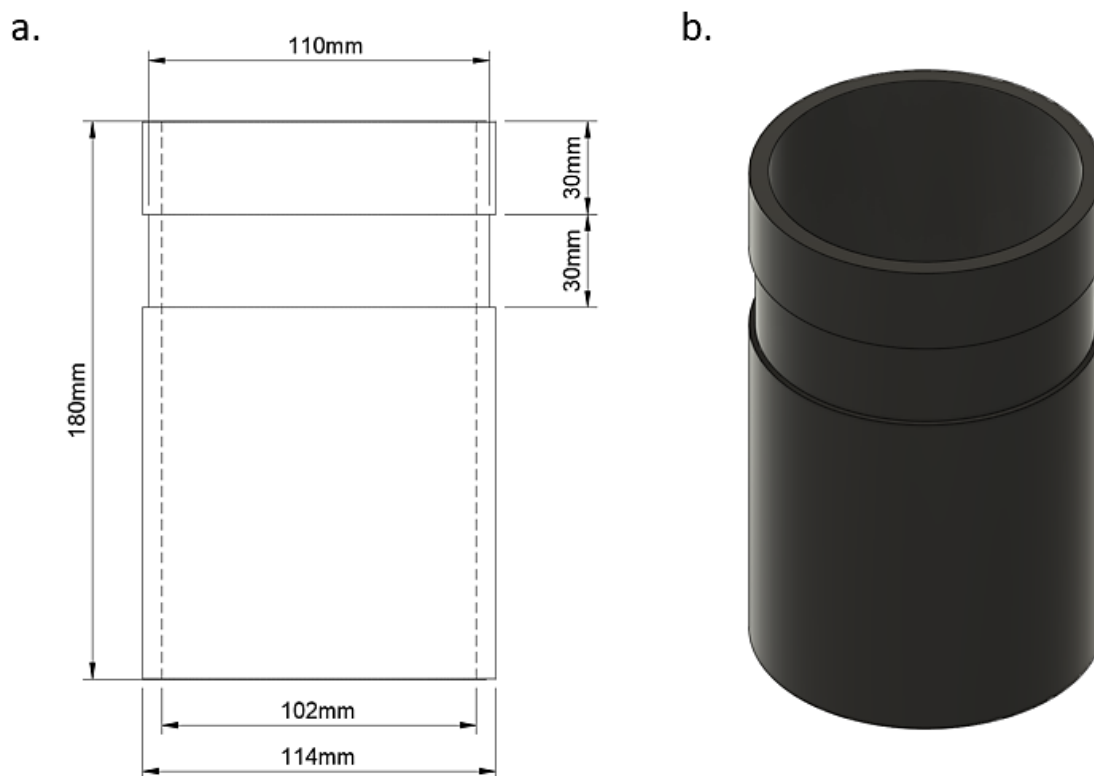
Sensor body design (a) Dimensioned drawing of side view of the sensor body. (b) 3D CAD Model rendering of sensor body design.
